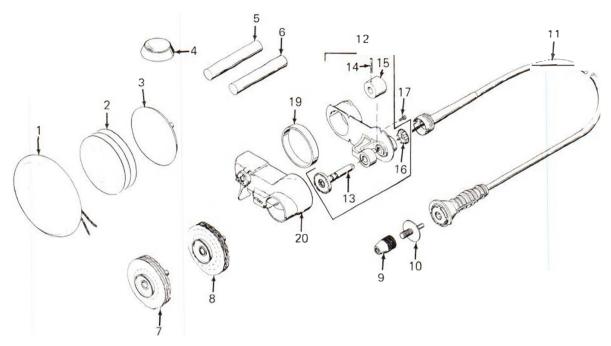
Kirby HERITAGE Handi-Butler group, exploded view
